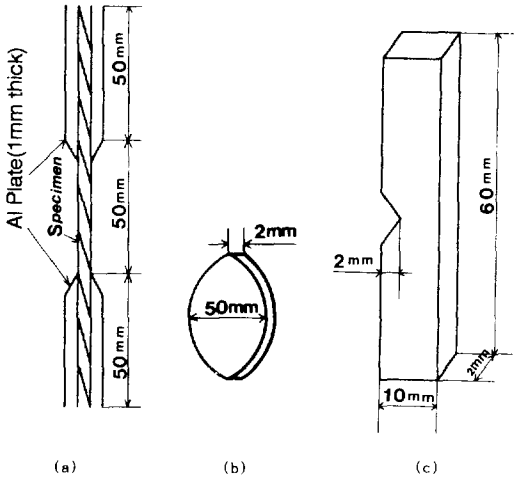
Specification of the specimens (a) for the tensile test, (b) for the steel-ball impact test, (c) for the sharp impact test.
